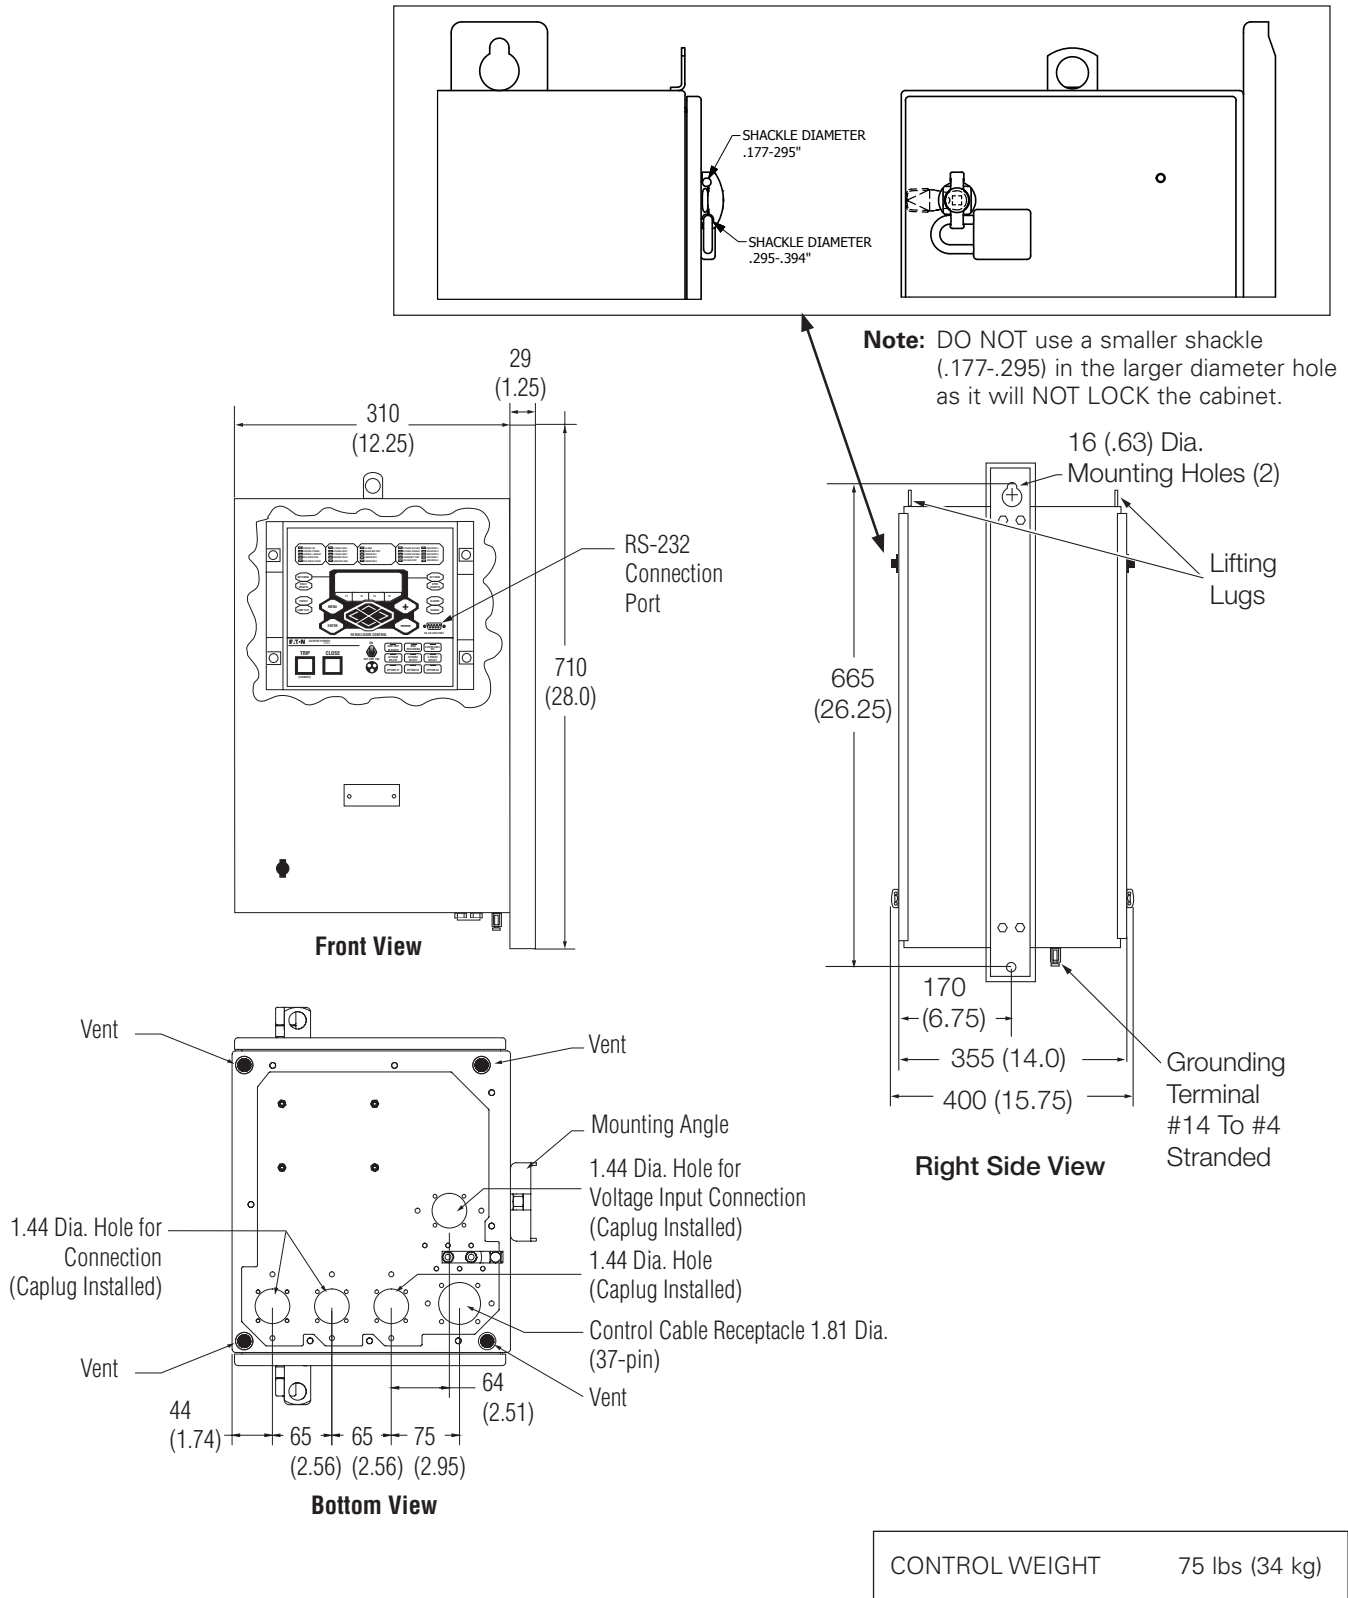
Form 6 NX-T/LS pole mount recloser control weight, dimensions, and pad-lock shackle diameters
